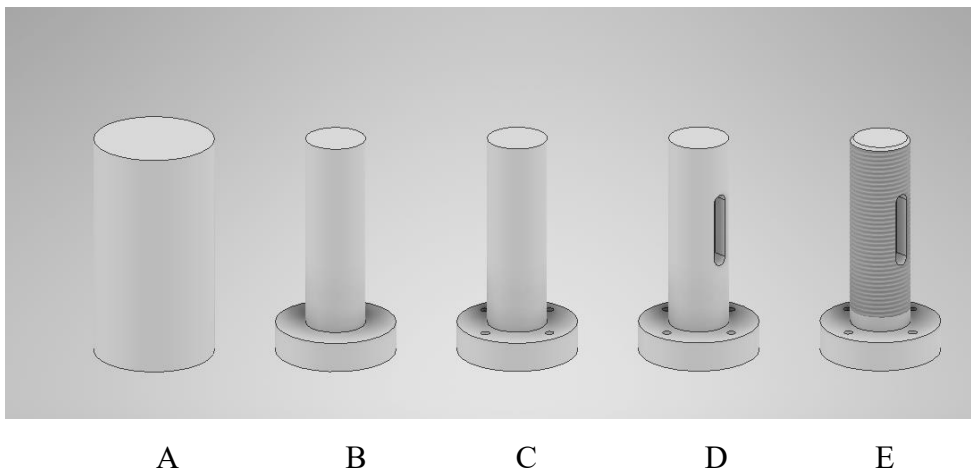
The principle of subtractive manufacturing (drawn by Autodesk Inventor Professional). (A) intact metal cone, (B) after turning, (C) boring four holes, (D) milling a slot, (E) threading.
